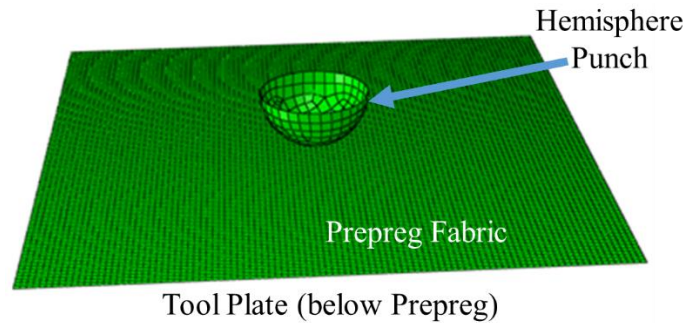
Fabric forming model geometry showing punch and fabric initial position
